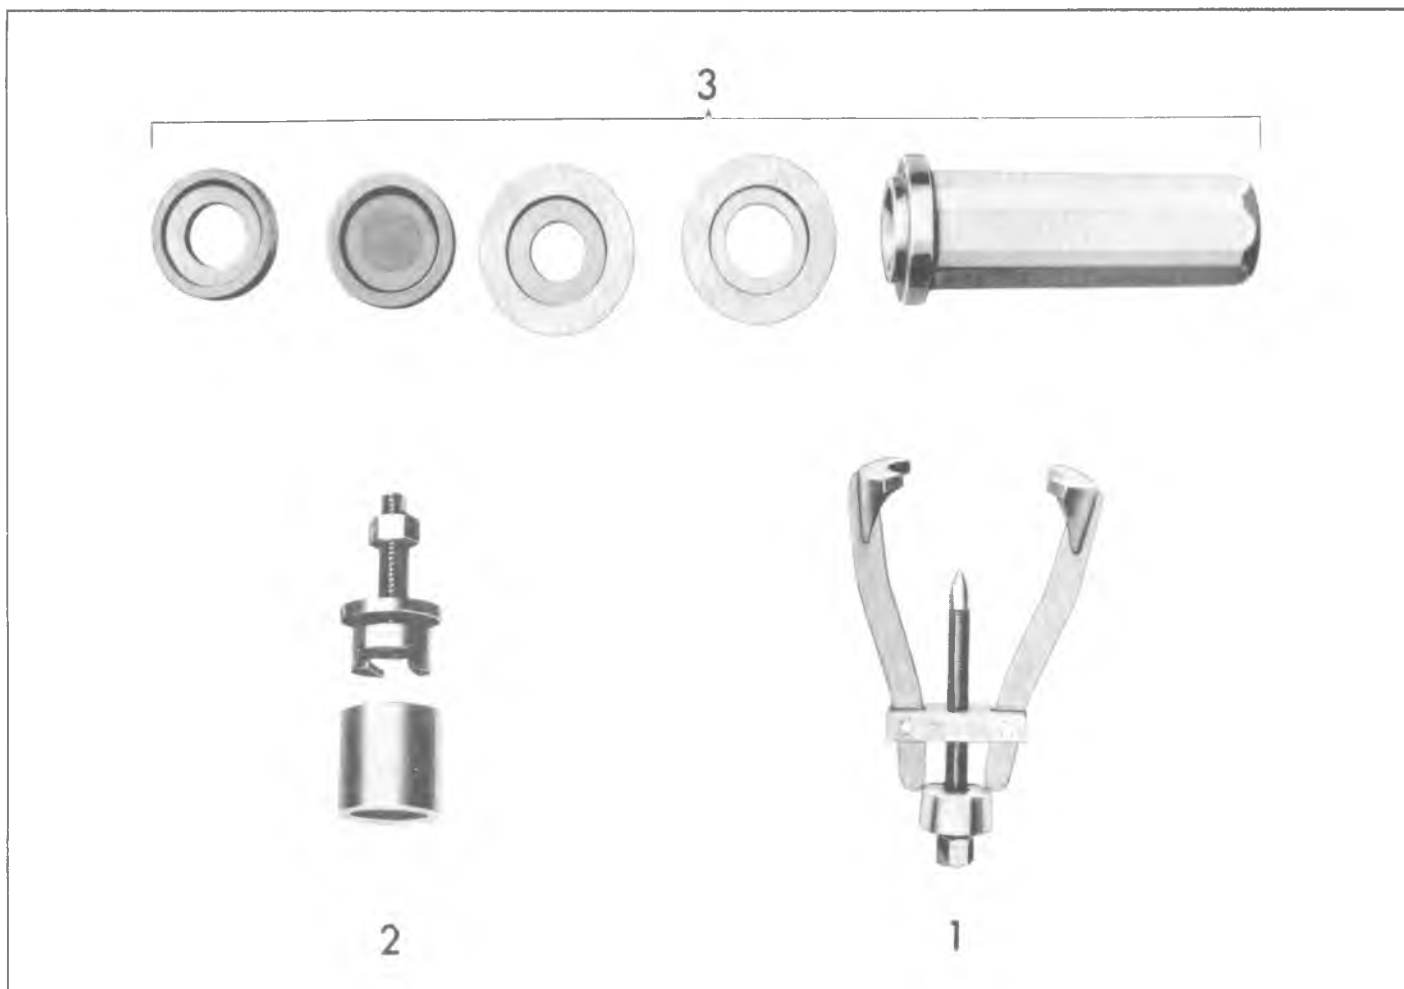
T—Five-Speed (Clark) Transmission Special Tools
